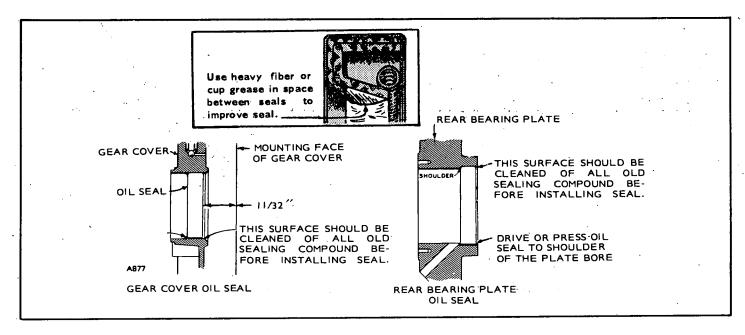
GEAR COVER AND REAR BEARING PLATE O'IL SEALS
